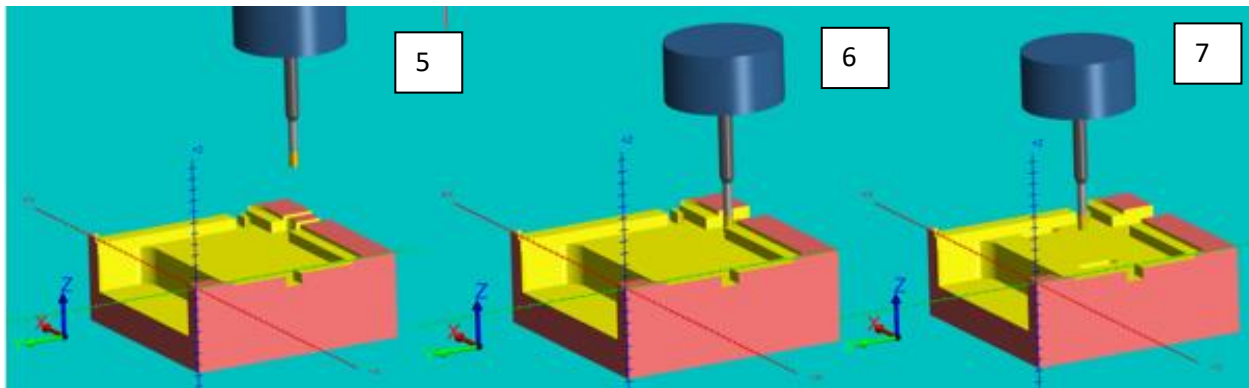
Snipping Tool Image of Steps 5,6,7 Mastercam Tool Paths
